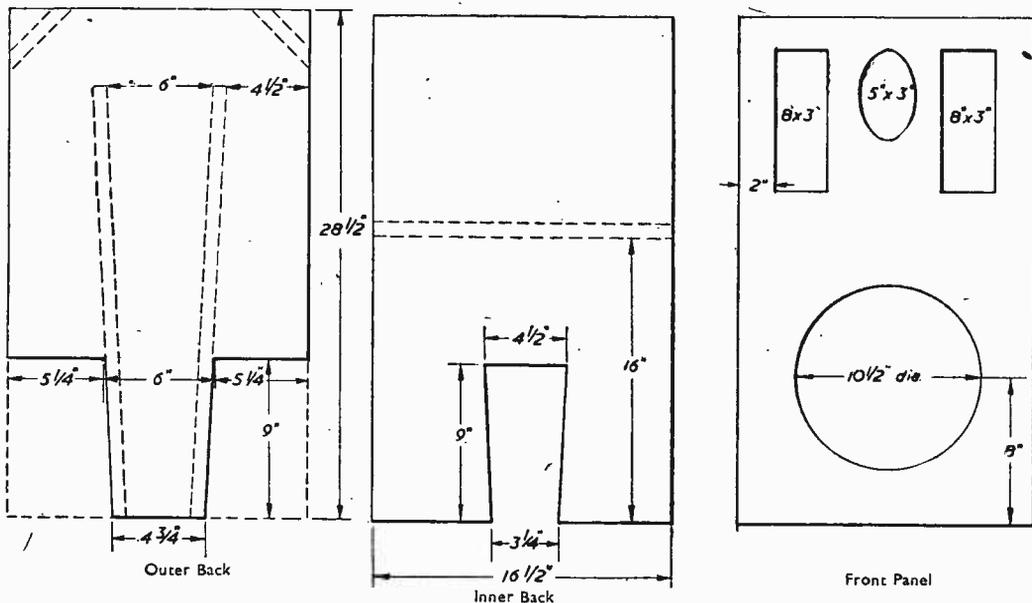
The front and back indicating the position of the partitions, gussets and shelf.
